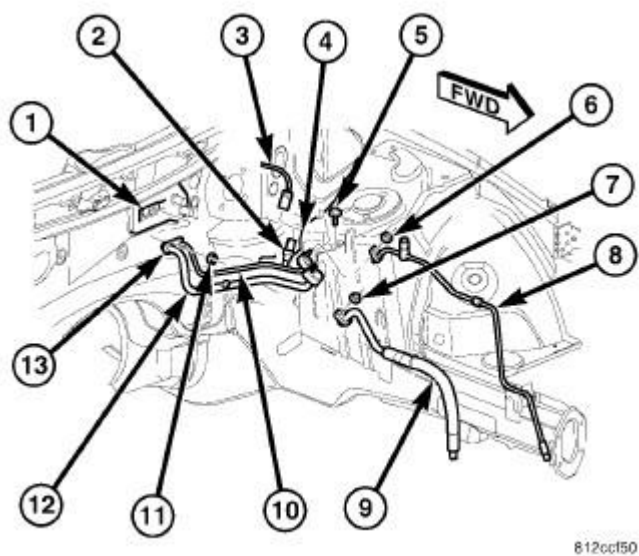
Line-A/C Liquid/Suction-Rear Removal & Installation
